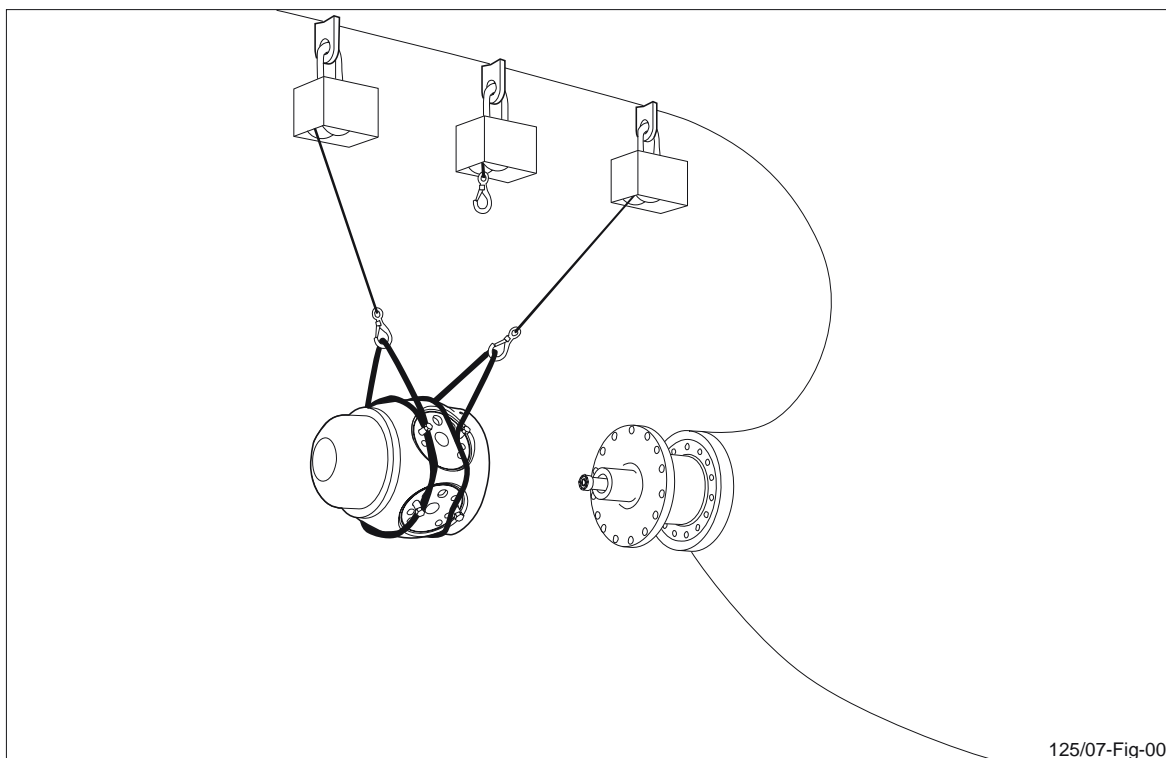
Lifting a small sized propeller hub without blades using soft slings.
